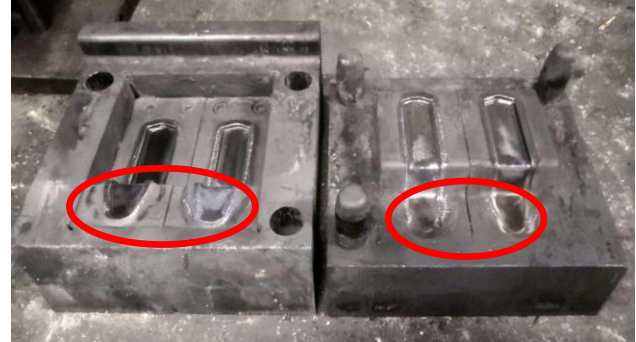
Locations of the greatest abrasive wear on forging inserts Pre-forging cavity (for two guide pins) and finishing cavity (for one guide pin) dies for forging of contactor forgings on the press
